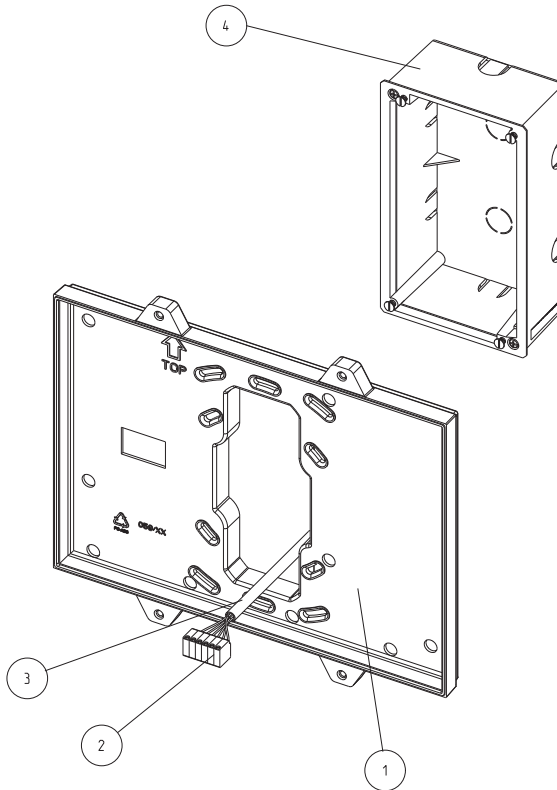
Installation Overview of Shallow Back Cover Mounting Kit - To be mounted with zonal display
